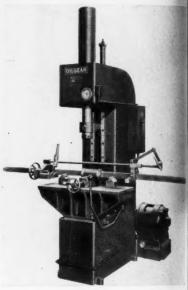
Oilgear 15-Ton Type "PGRF" Gossneck Press Arranged for Straightening Mile Barrels
